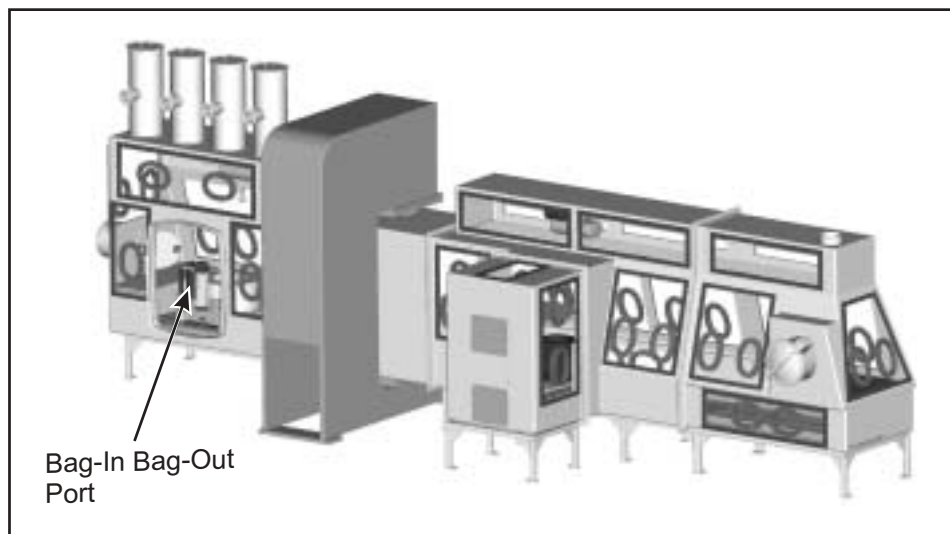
Bag-In/Bag-Out Port for Equipment Removal
